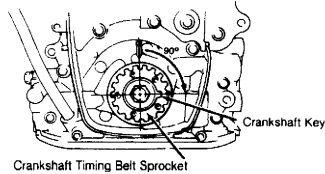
Positioning Crankshaft Timing Belt Sprocket For Camshaft Removal (DOHC)
